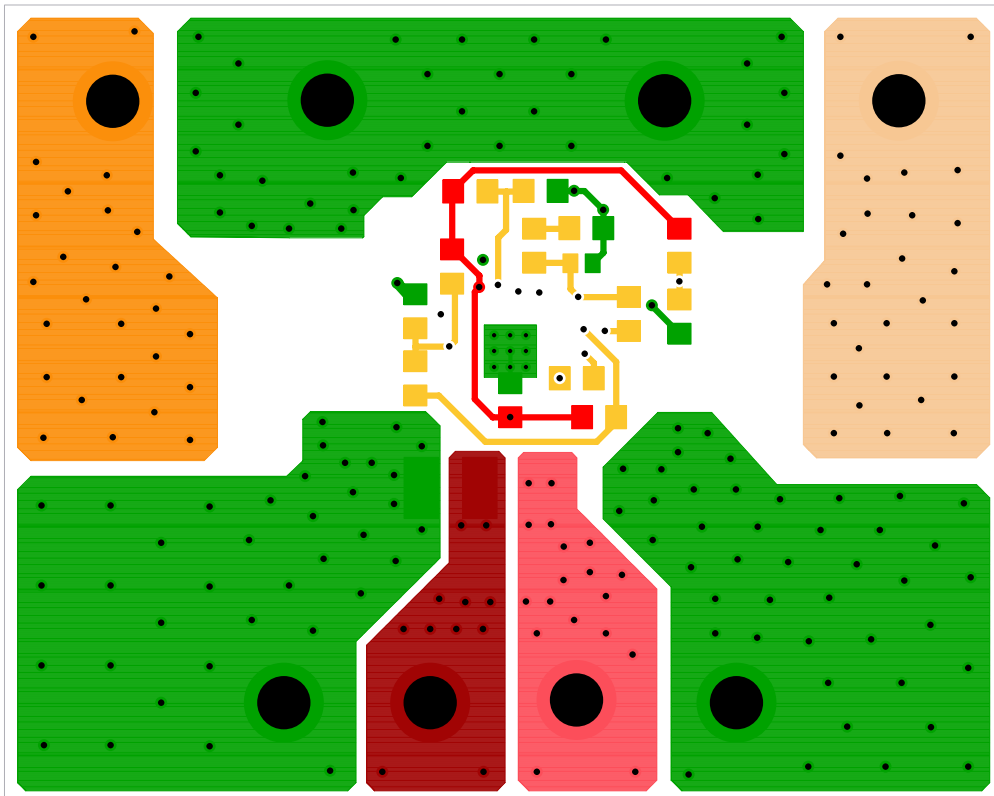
BOTTOM LAYER SOLDER SIDE
